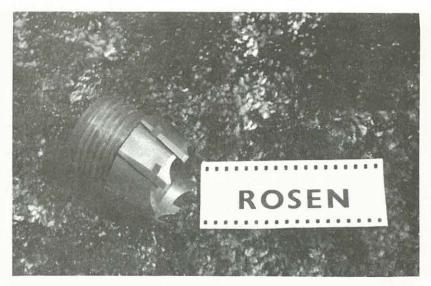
The Rosen cutter was an earlier model eight-tooth cutter that could be used in place of the standard Federal cutter.
